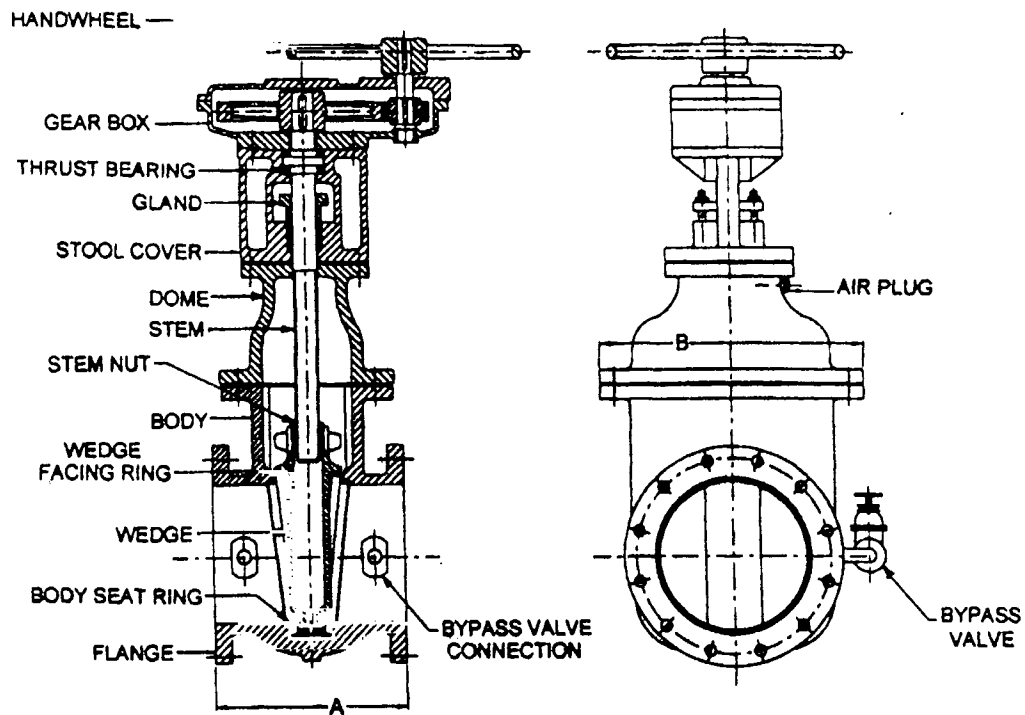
C TYPICAL SKETCH OF A SLUICE VALVE WITH BALL THRUST BEARING AND SPUR GEAR ARRANGEMENT
